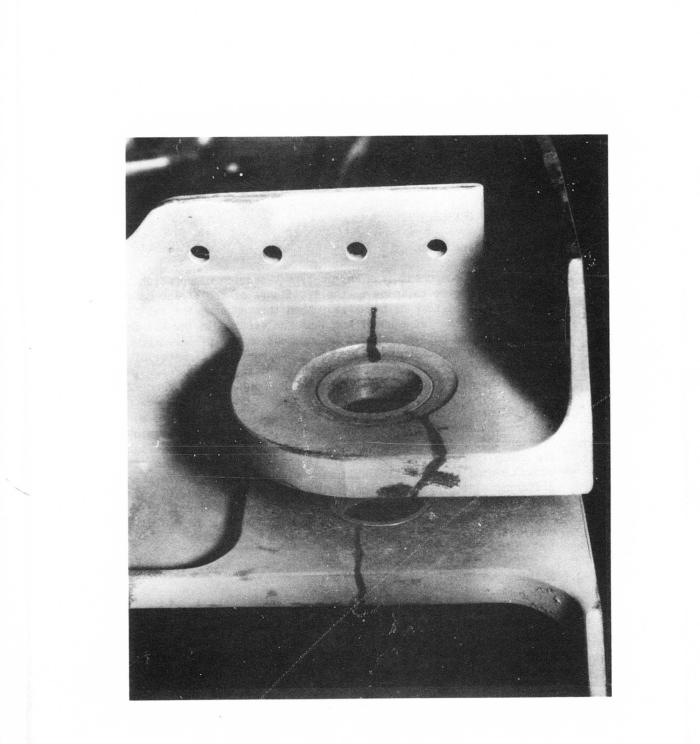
Failure of Wingtip Fold Rib Lower Aft Locking Lug
